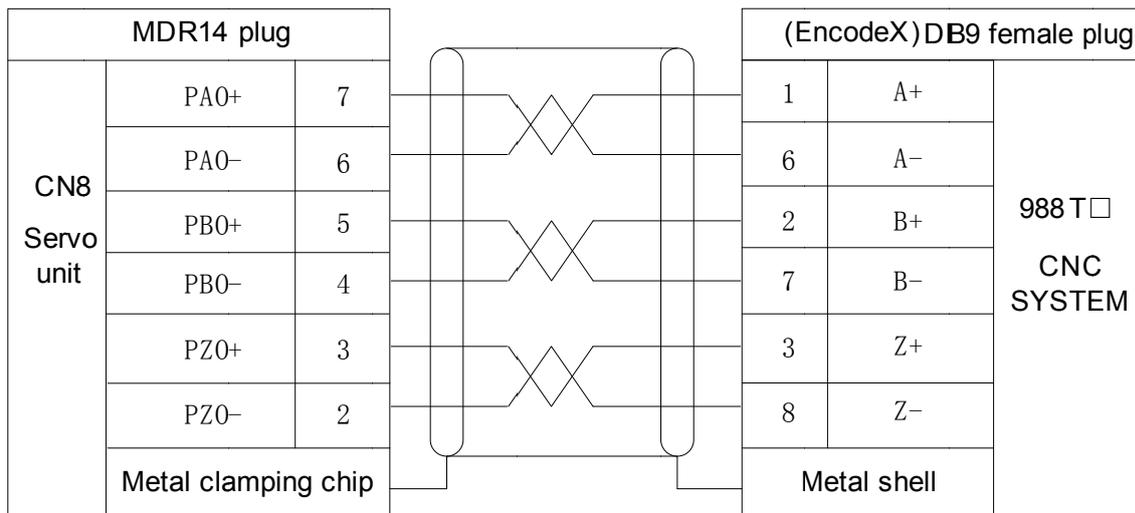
CN8 wiring plug pin (Welding cable side)
